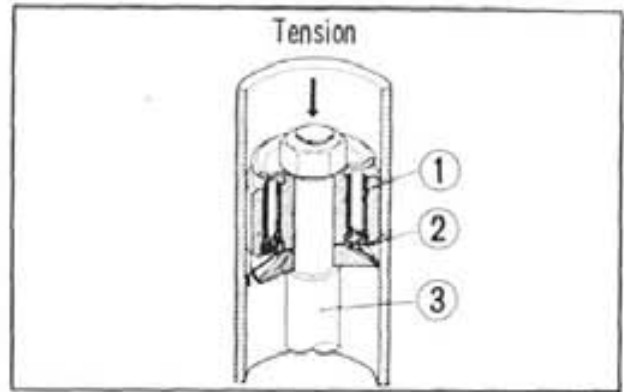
① Piston ② Valve ③ Rod
